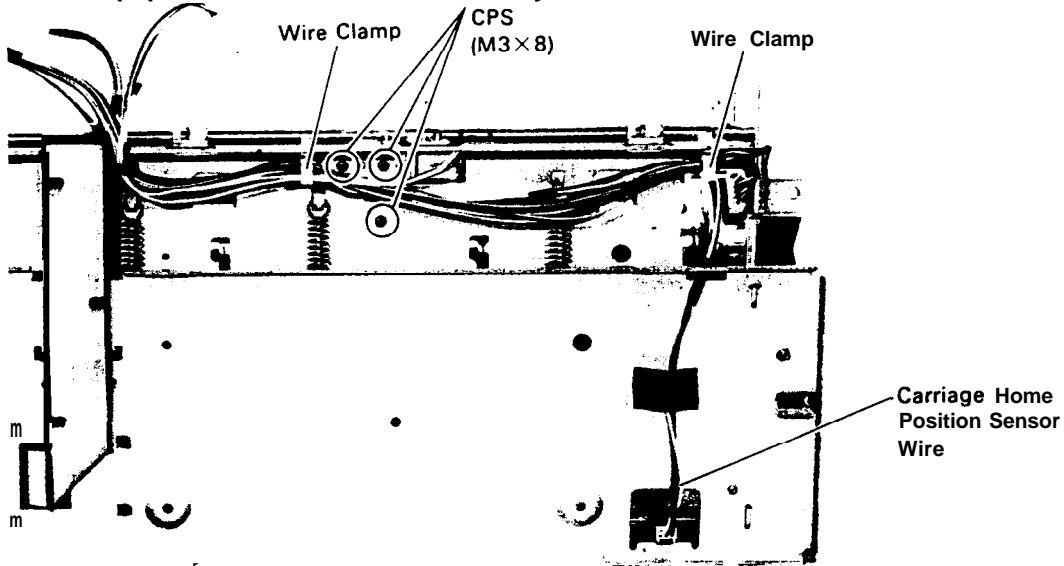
Paper Thickness Sensor Assembly Removal (1)
